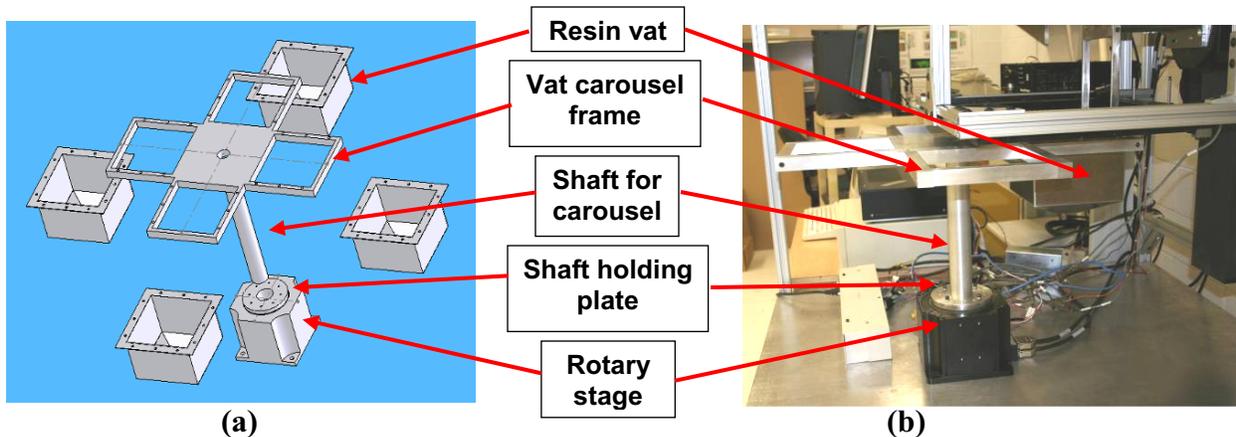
(a) Vat carousel assembly exploded view, (b) Vat carousel assembly.
